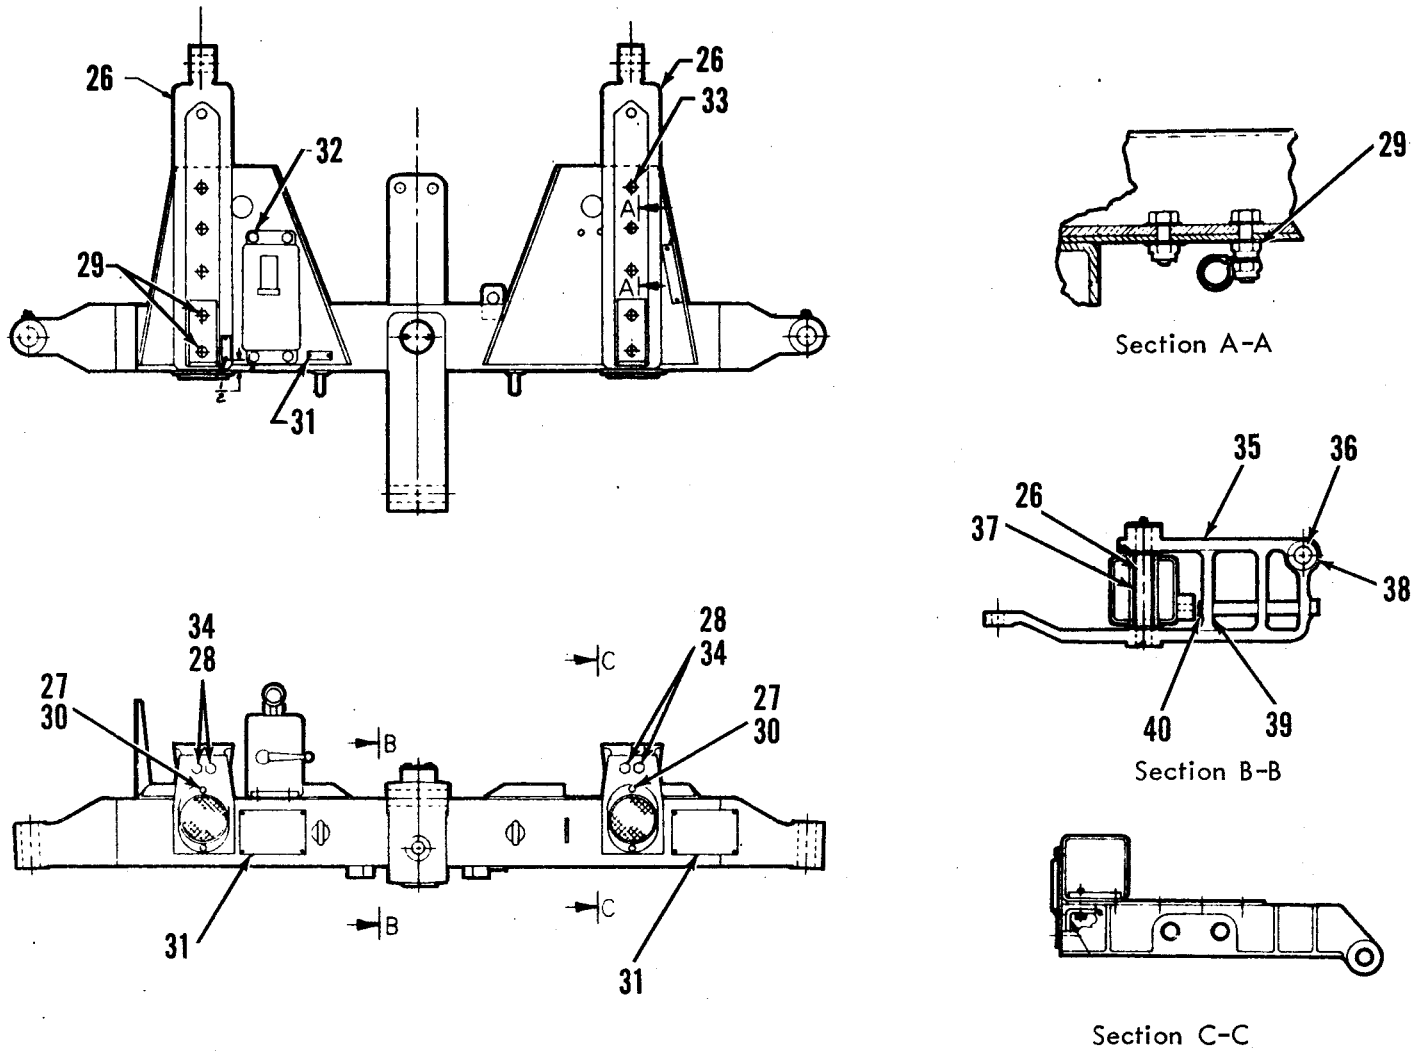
FRONT AXLE ASSEMBLY (SHEET 2 OF 2)
